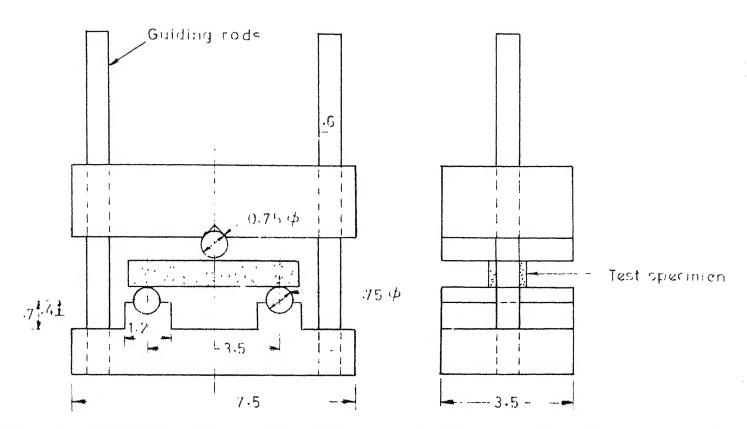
FRONT VIEW AND SIDE VIEW OF THE BEARING EDGES FOR MODULUS OF RUPTURE TEST
